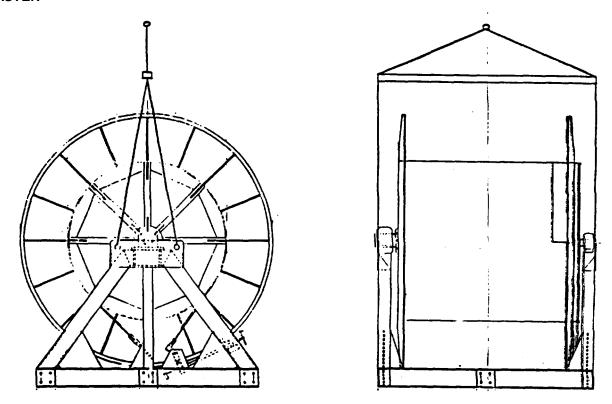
Winch: One-Dimensional Lifting Sling Configuration
